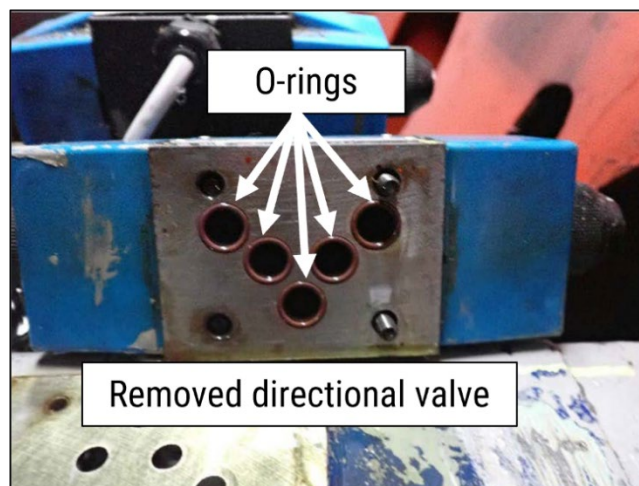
Removed directional valve from *American Mariner* showing the replaced O-rings during winter layup. (Source: Grand River Navigation, Inc.)
